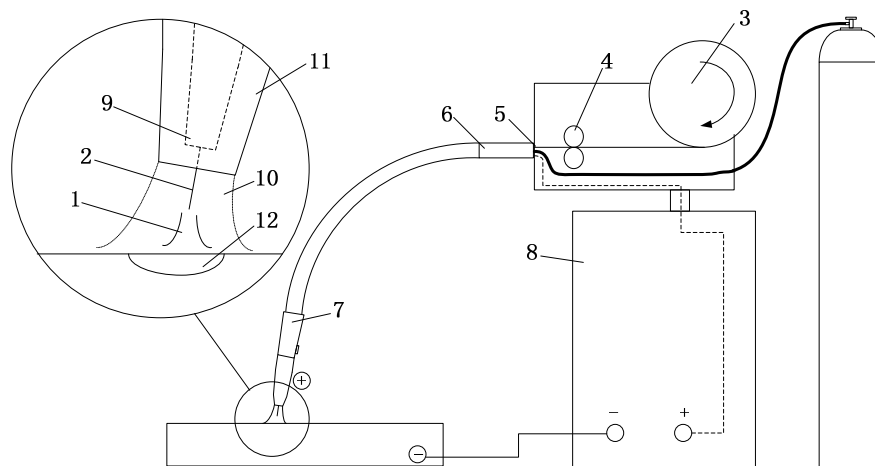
Typical GMAW equipment. (1: Arc; 2: Metal wire electrode; 3: Wire supply reel; 4: Wire feeding drive rollers; 5: Flexible conduit; 6: Hose package; 7: Welding gun; 8: Power source; 9: Contact tube; 10: Shielding gas; 11: Gas nozzle; 12: Weld pool.) (Adapted from [8])
